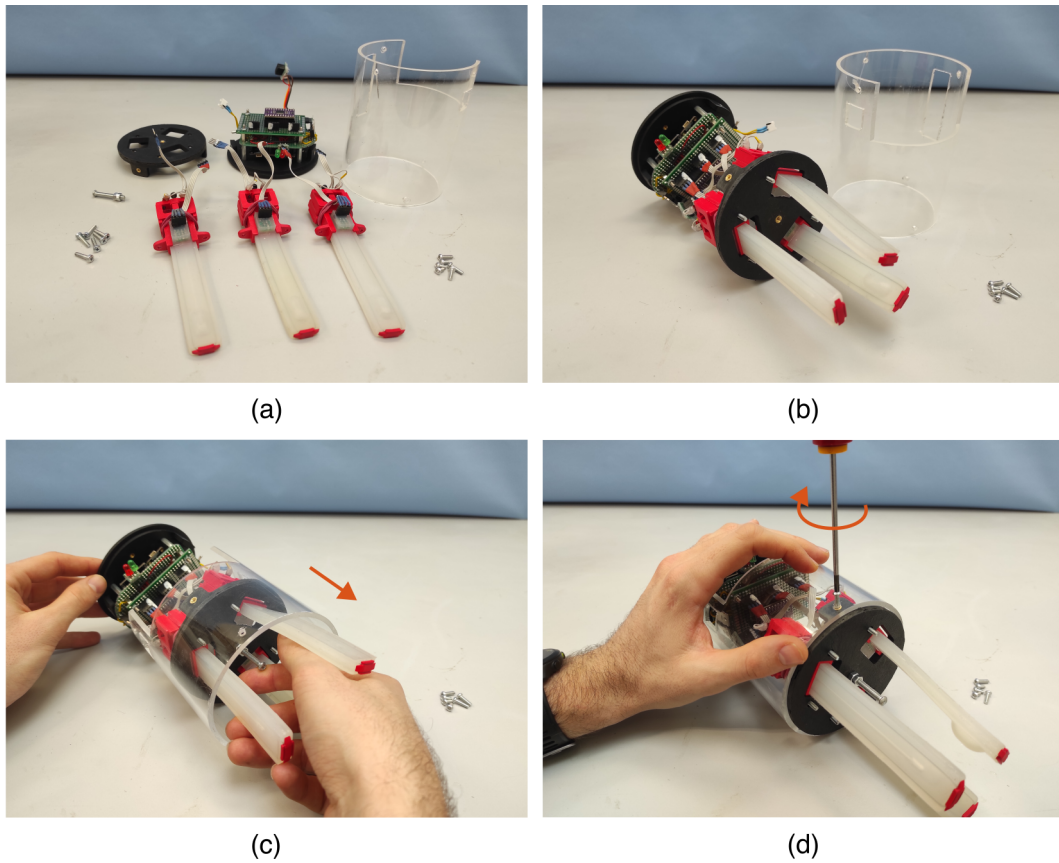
Final assembly sequence of the gripper. (a) All produced parts, ready to be assembled together. (b) Wiring. (c) The outer shell is installed with the help of the auxiliary screw. (d) All the parts are secured in place with screws.
